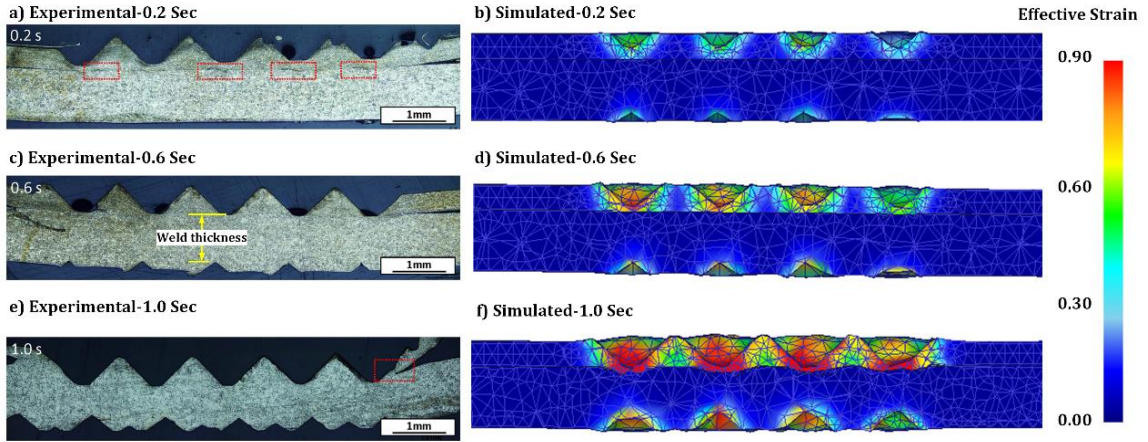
Simulated deformed geometry under different welding durations compared with the experimental results in [143].
